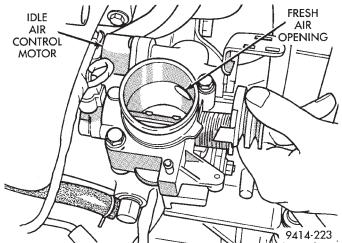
Idle Air Control Motor Air Bypass Passage— 2.0/2.4L
